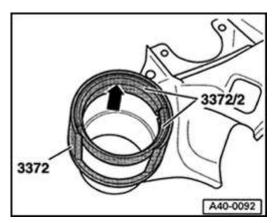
Identifying All Bonded Rubber Bushings On Subframe Are Pulled Out Using Same Special Tool Courtesy of VOLKSWAGEN UNITED STATES, INC.
